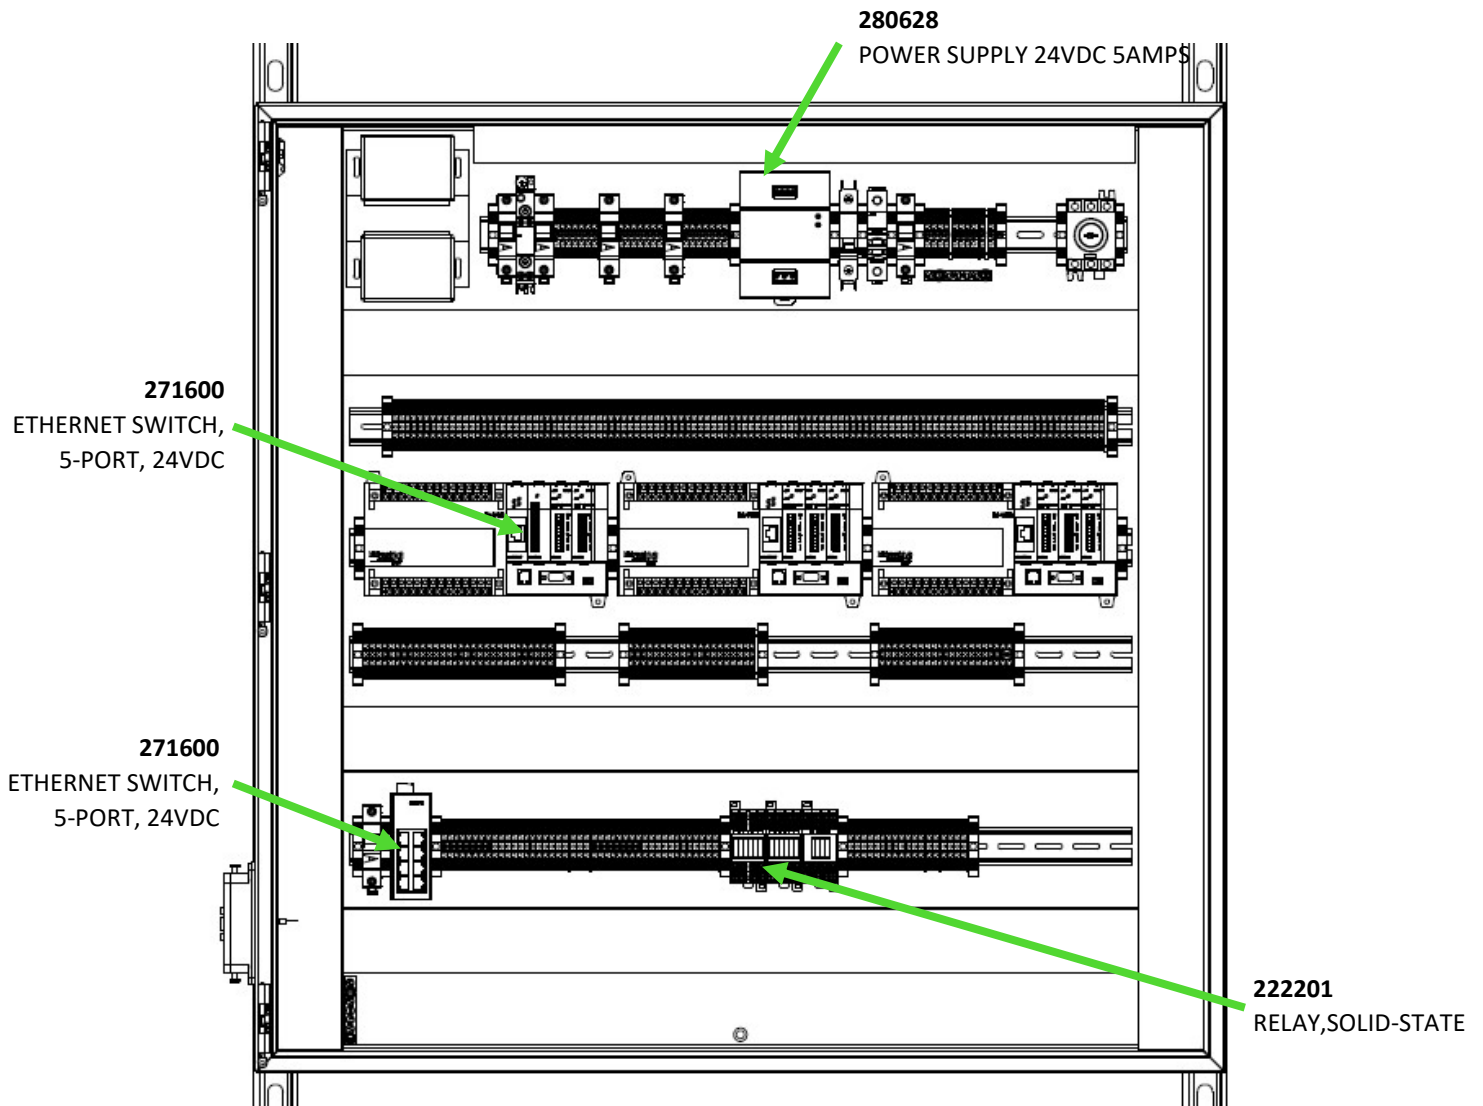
095133-70-112 Single PLC MCP Assembly Layout
